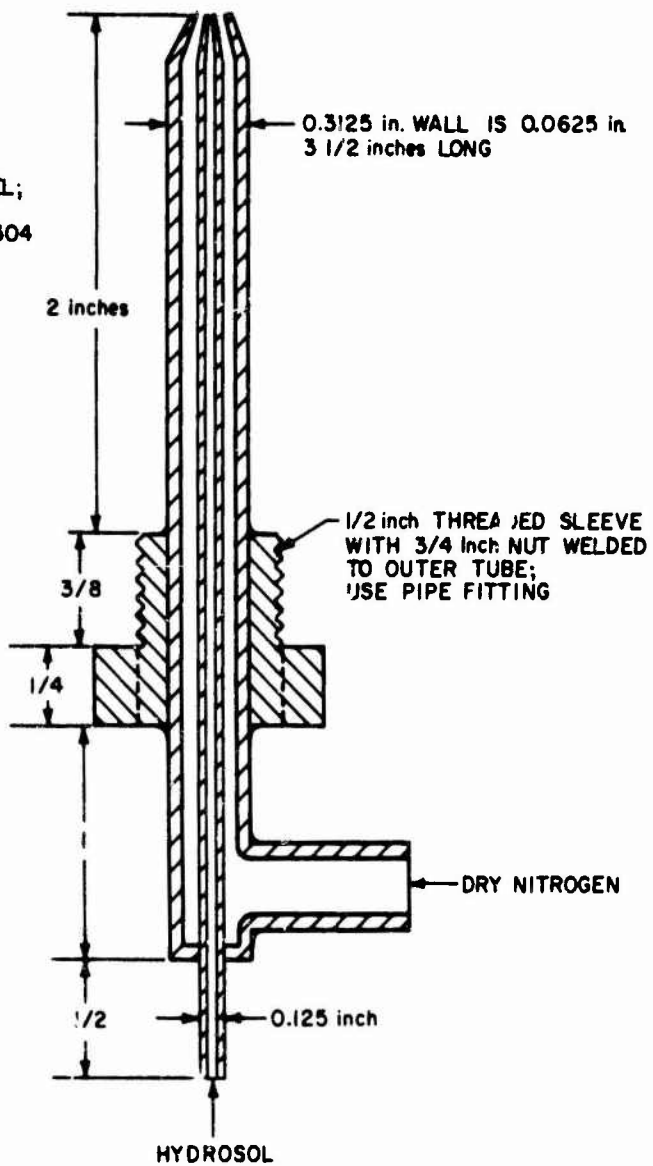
1 1/2 INCH FLANGE-ASPIRATOR HOLDER
